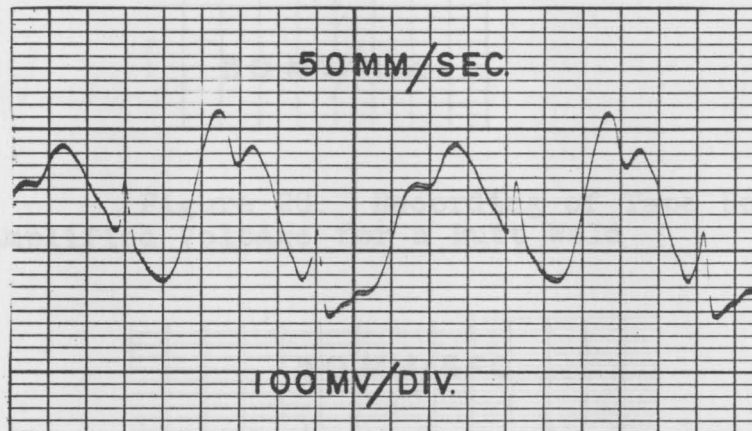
Recording of Single Hall Probe Voltage for a Butt Weld
